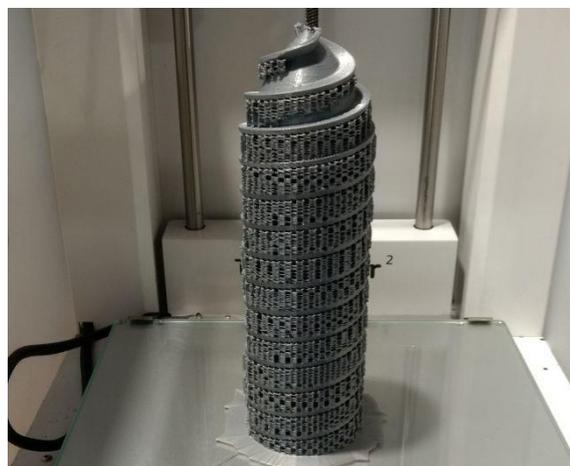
3D printed Rotor with burr left from the Printing support process.
